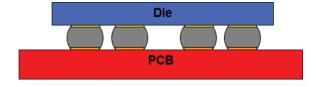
Thicker PCB thickness will have larger stiffness between die & PCB which induce more stress.
